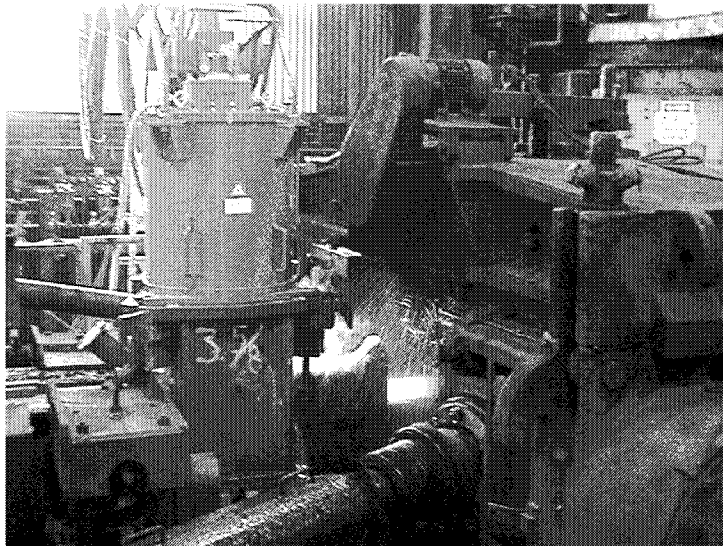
View of the inspection head located on line measuring a tube being processed
